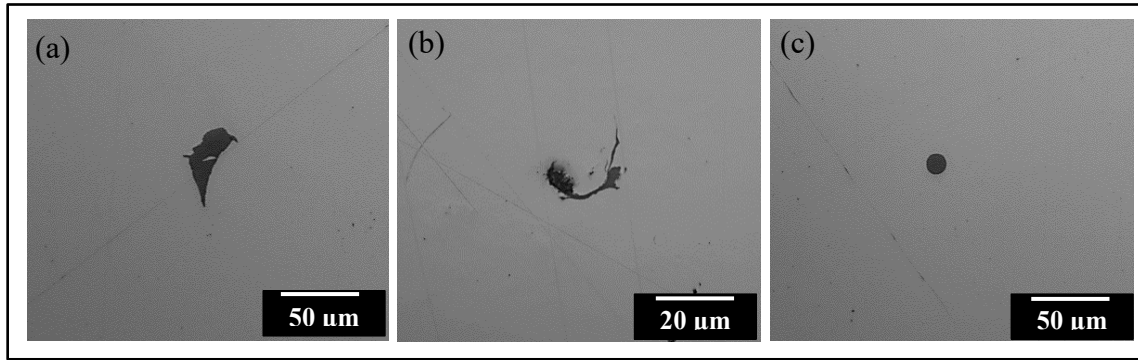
Optical microscopy image of manufacturing defects in additively manufactured specimens including: (a) and (b) LOF, (c) spherical gas porosity.
